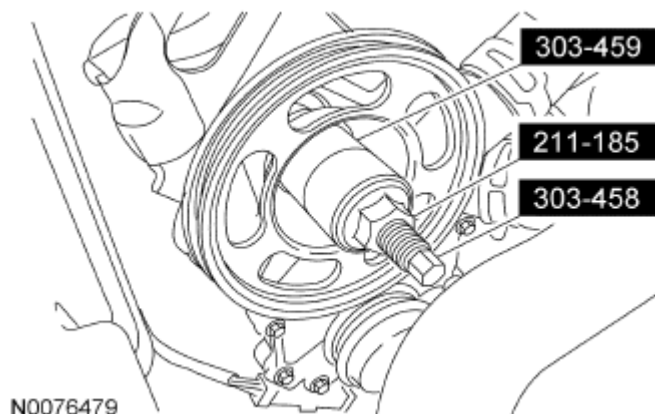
Identifying Camshaft Pulley Installer, Power Steering Pump Pulley Installer And Water Pump Pulley Spacer
